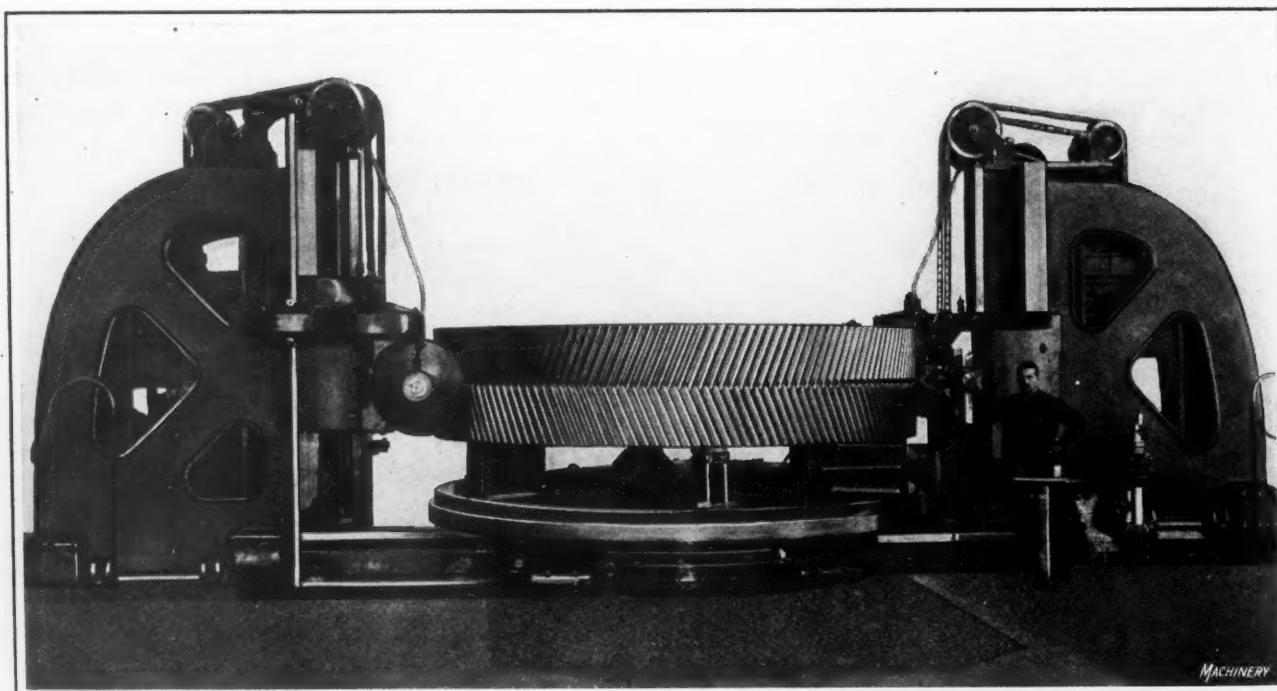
Cutting Large Herringbone Gear on Machine having Capacity for Gears up to 16 Feet 3 Inches in Diameter
